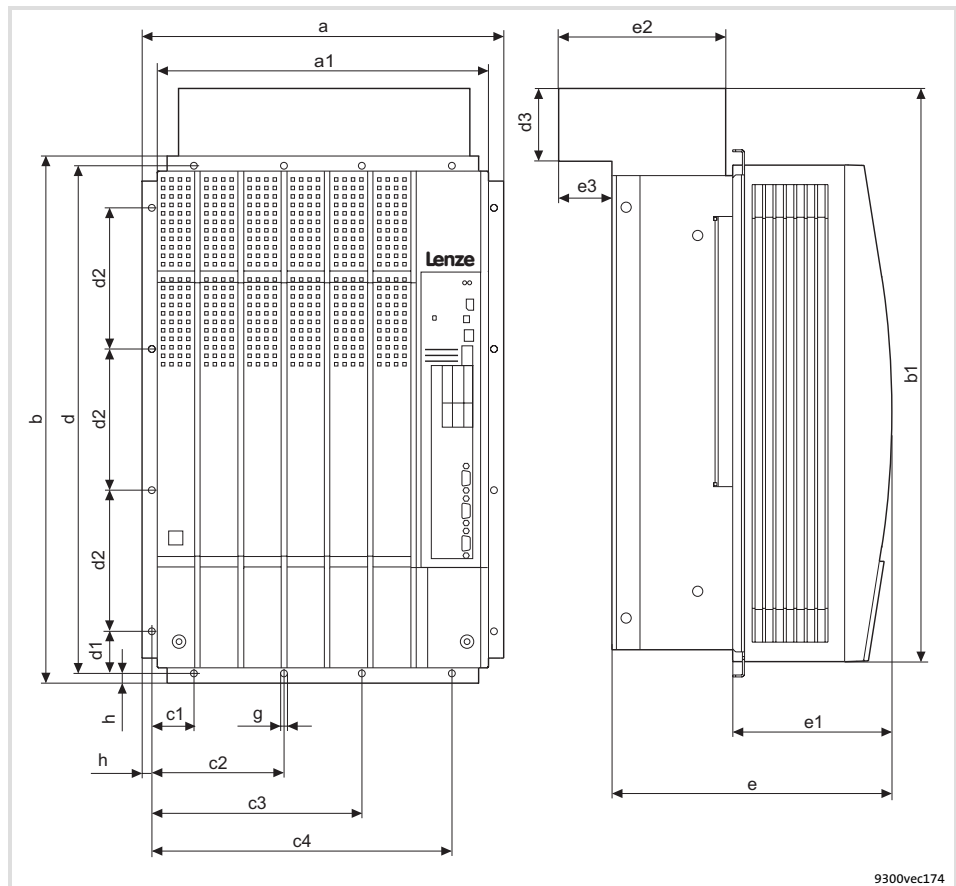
Dimensions for thermally separated mounting 55 kW
